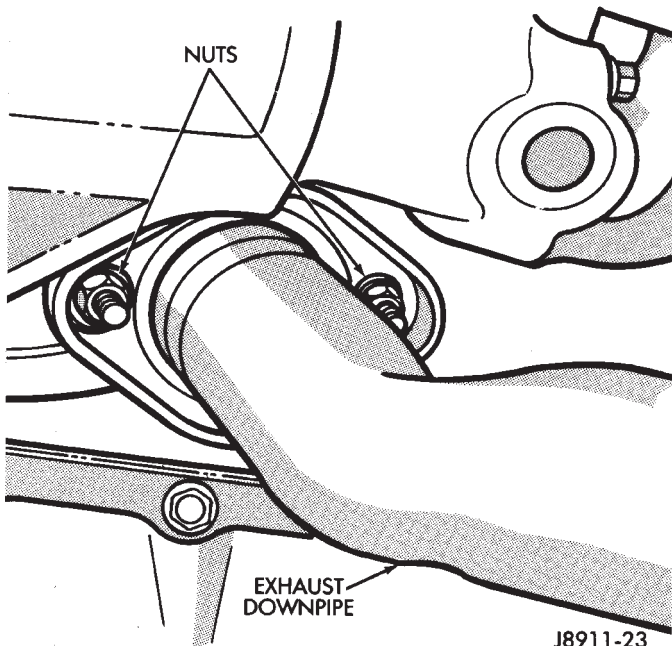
Exhaust Pipe-to-Engine Exhaust Manifold Bolts and Nuts
